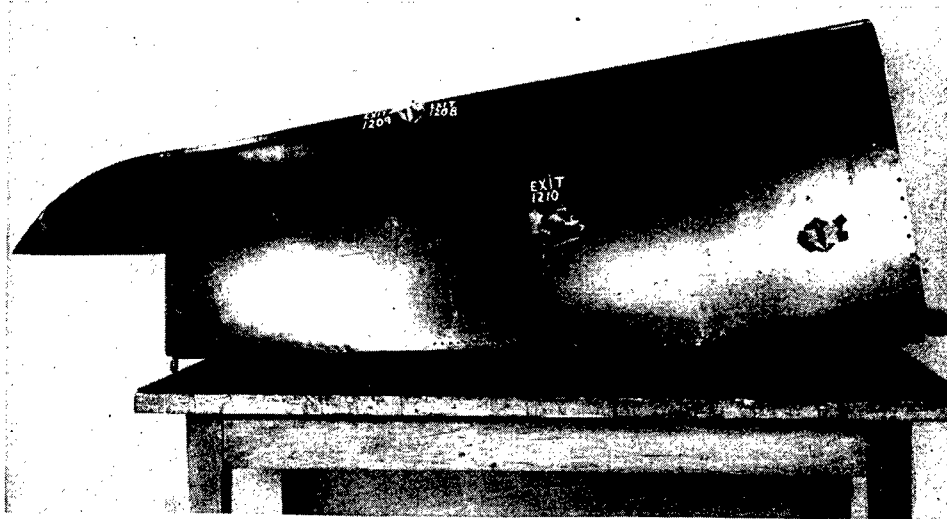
Damage to horizontal stabilizer before repair. General view.
